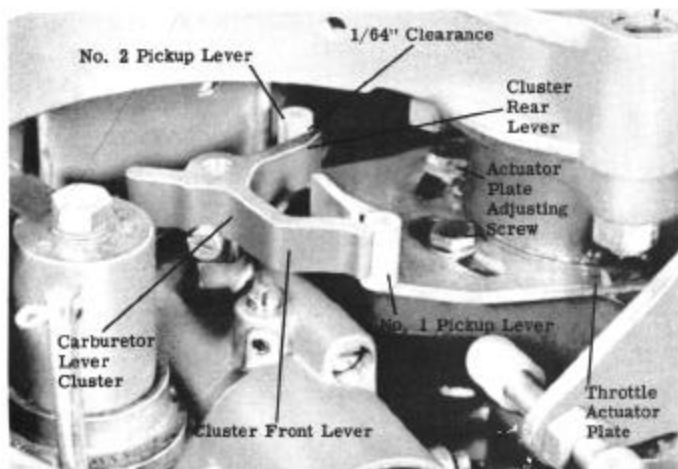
Carburetor Throttle Pickup Plate Adjustment
